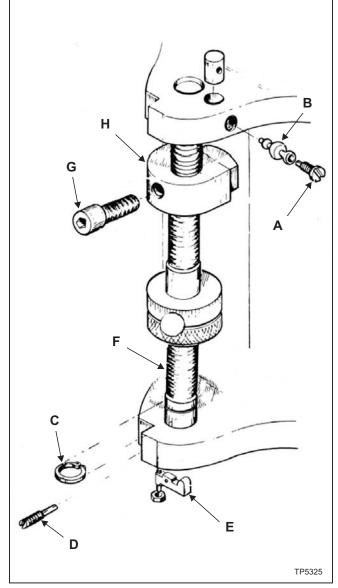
Micro Feed Trip Assembly and Quill Removal
